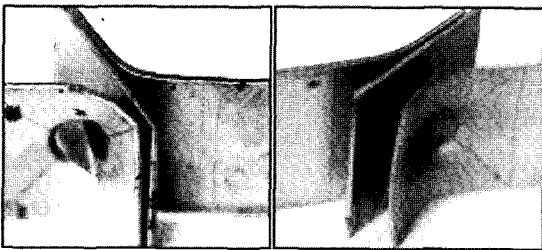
Macrostructure showing expulsion at the edge of weld zone for 1.4(E)+1.4(H)+1.4(H) specimens
